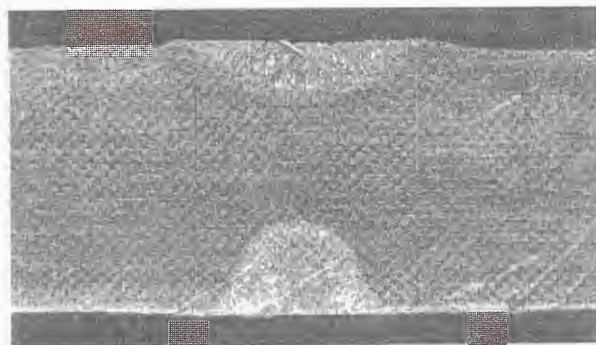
Transverse macrosection of weld in welding by independent arcs ($\times 4$) (reduced by 0.80): top — by reverse polarity current; below — by straight polarity current; welding current of 180 A.
